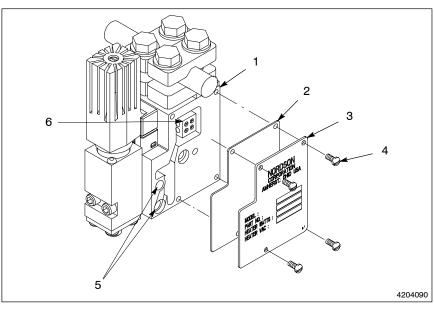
Removing or Installing the Manifold Cover Plates, Insulators, and
